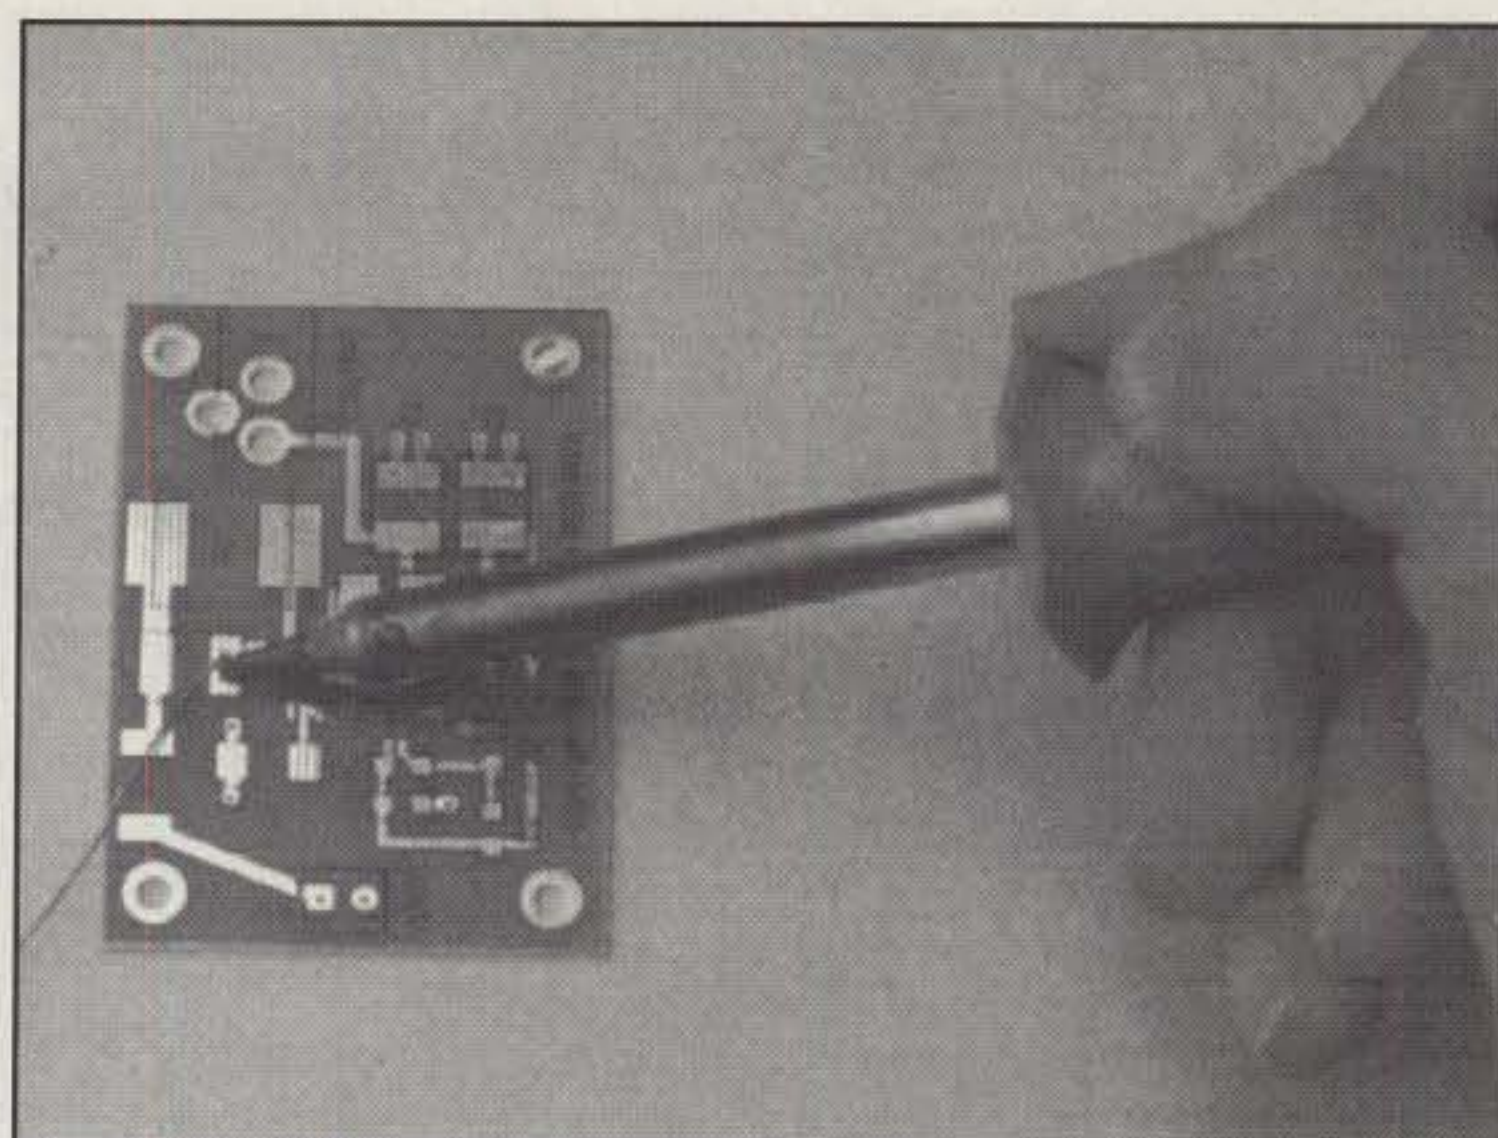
Extra large components in the Embedded Research EPS-1 kit make it an ideal first project, and aid in explaining the assembly process. Here I am "wetting" a pad with a tiny touch of solder.
